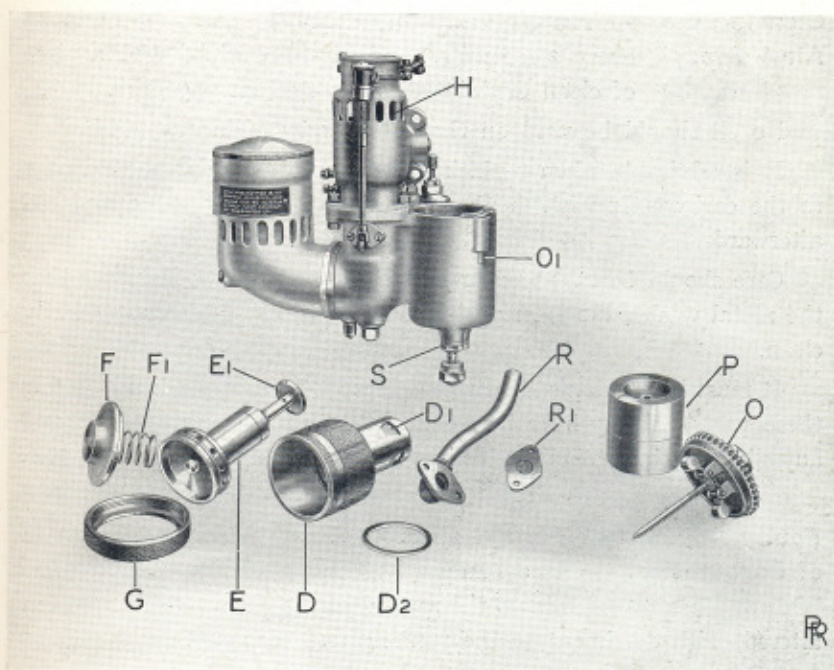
CARBURETTER, WITH CERTAIN PARTS DISMANTLED.
